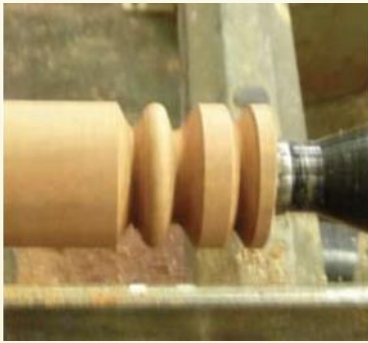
Here the top of the ring-to-be has been cut with the Sorby beading tool.
